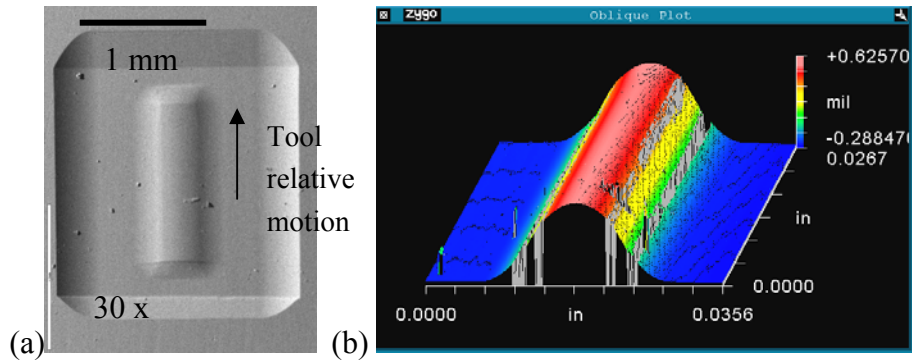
Convex cylinder feature machined in hard-plated copper with 1 mm nose-radius tool. Feature radius 1 mm , height 20 μm . (a) SEM image. (b) White-light interferometer image.
